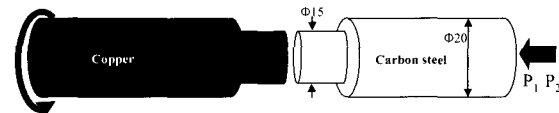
Schematic illustration of friction welding process and geometry of welded specimens (unit : mm)
